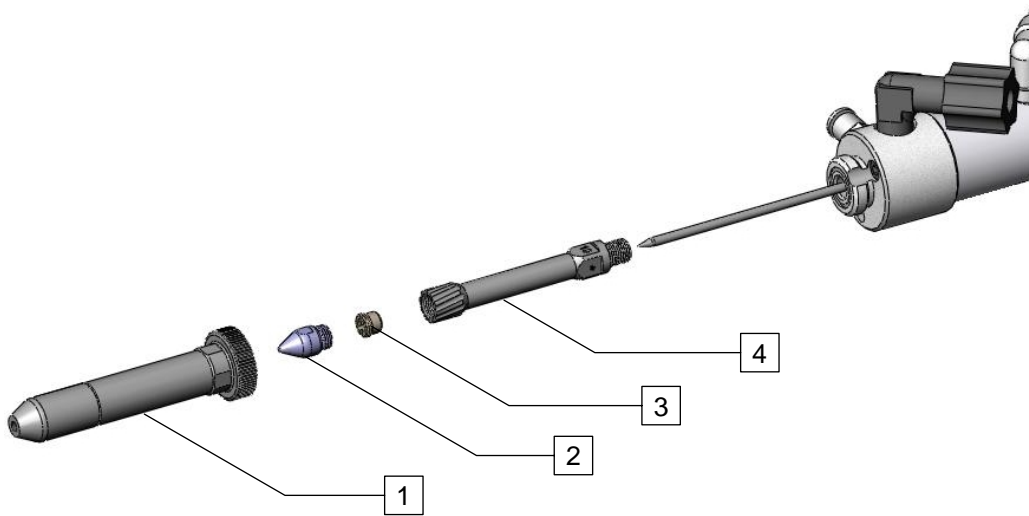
Cleaning the Nozzle (O-Rings not shown)
